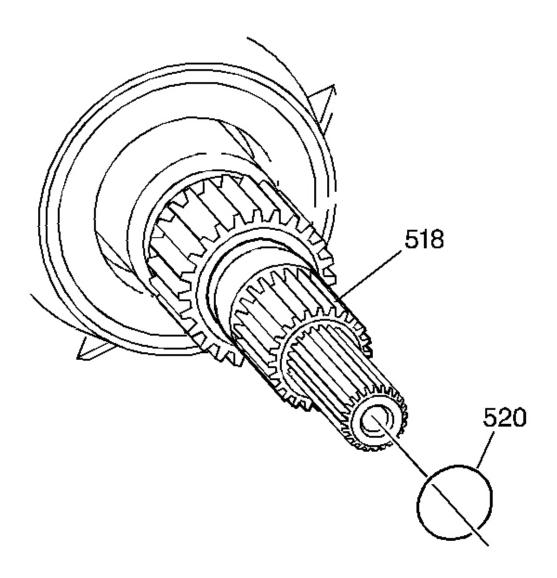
Installing Turbine Shaft O-Ring Seal On Turbine Shaft Courtesy of GENERAL MOTORS CORP.
